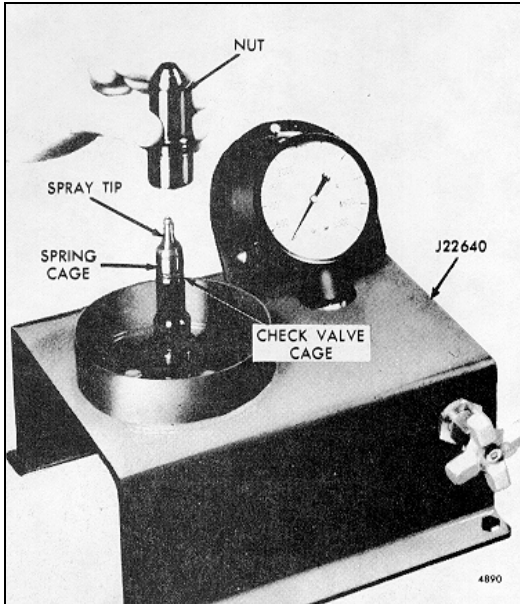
Installing Injector Valve Parts on Auxiliary Tester J 22640
